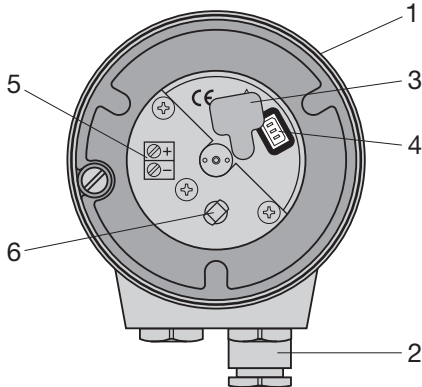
Housing (1) with the cover removed showing the screw terminals (5) and cable glands (2).
